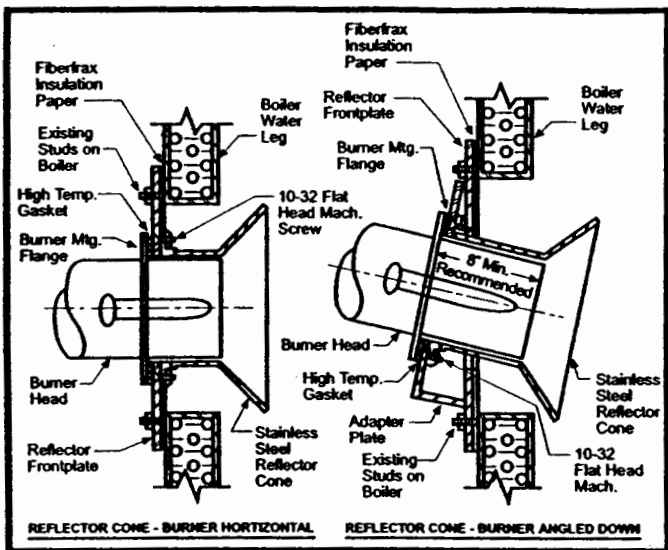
Reflector Frontplate Installation Boiler with Single Firing Door
